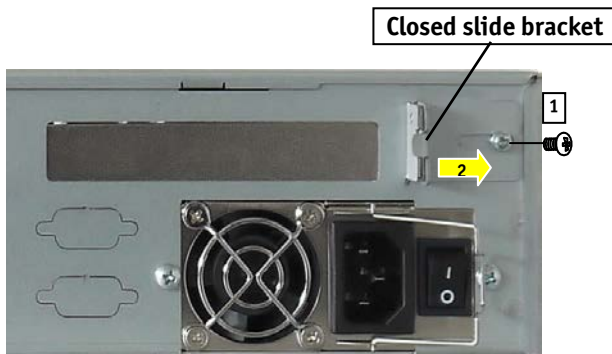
Detail of computer base – Installing /removing a slot/card bracket (shown with closed slide bracket)
